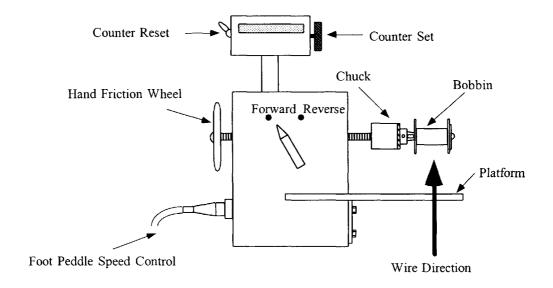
Simple Tube and Bobbin, Manually Operated Winder.
